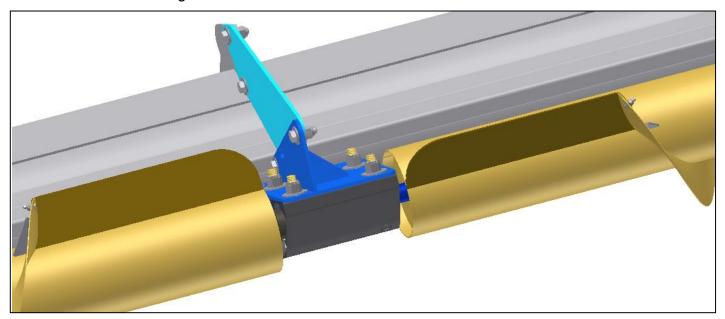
CENTER MOUNT FINISHED VIEW MACDON D50 KIT'S # 405865 AND 405866
